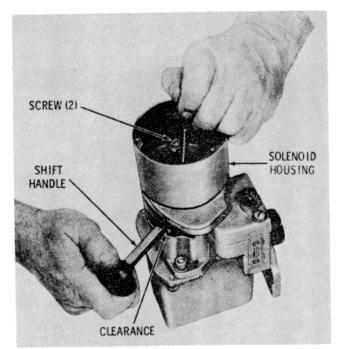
Checking Solenoid Housing Angular Adjustment
